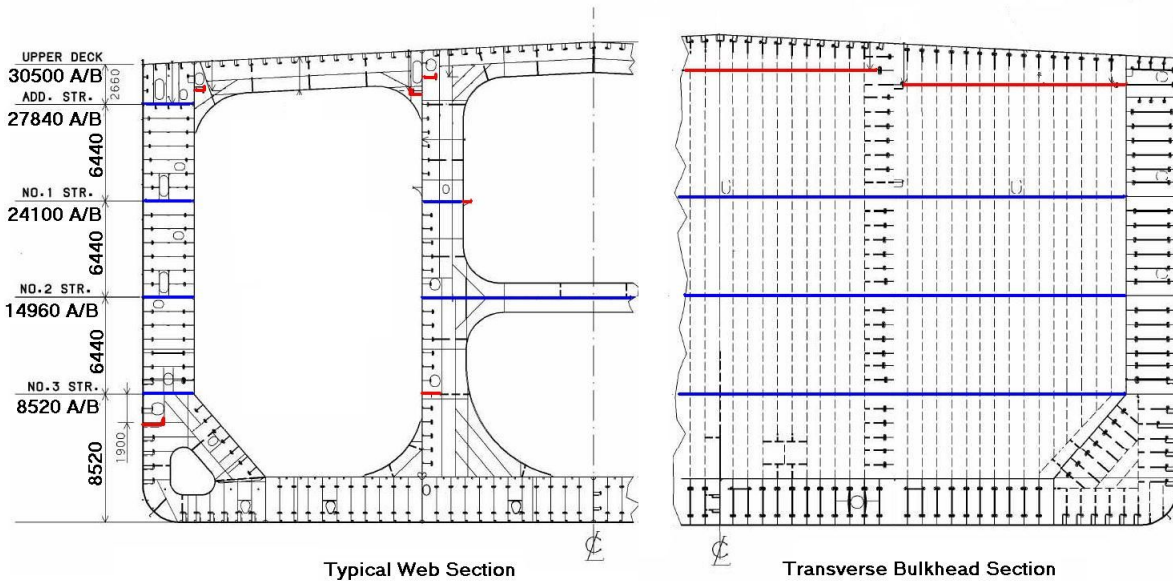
Typical Web Section and Transverse Bulkhead Section of VLCC
